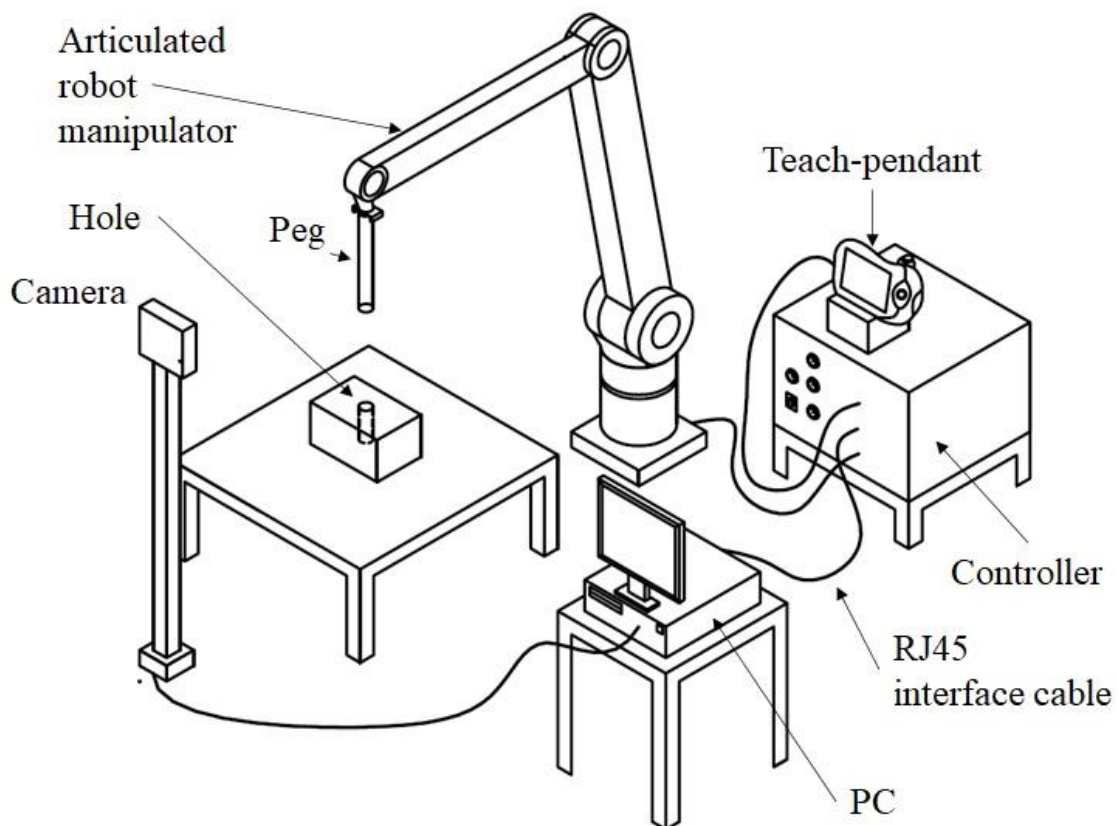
A robotic assembly of peg-in-hole with the vision sensor.
